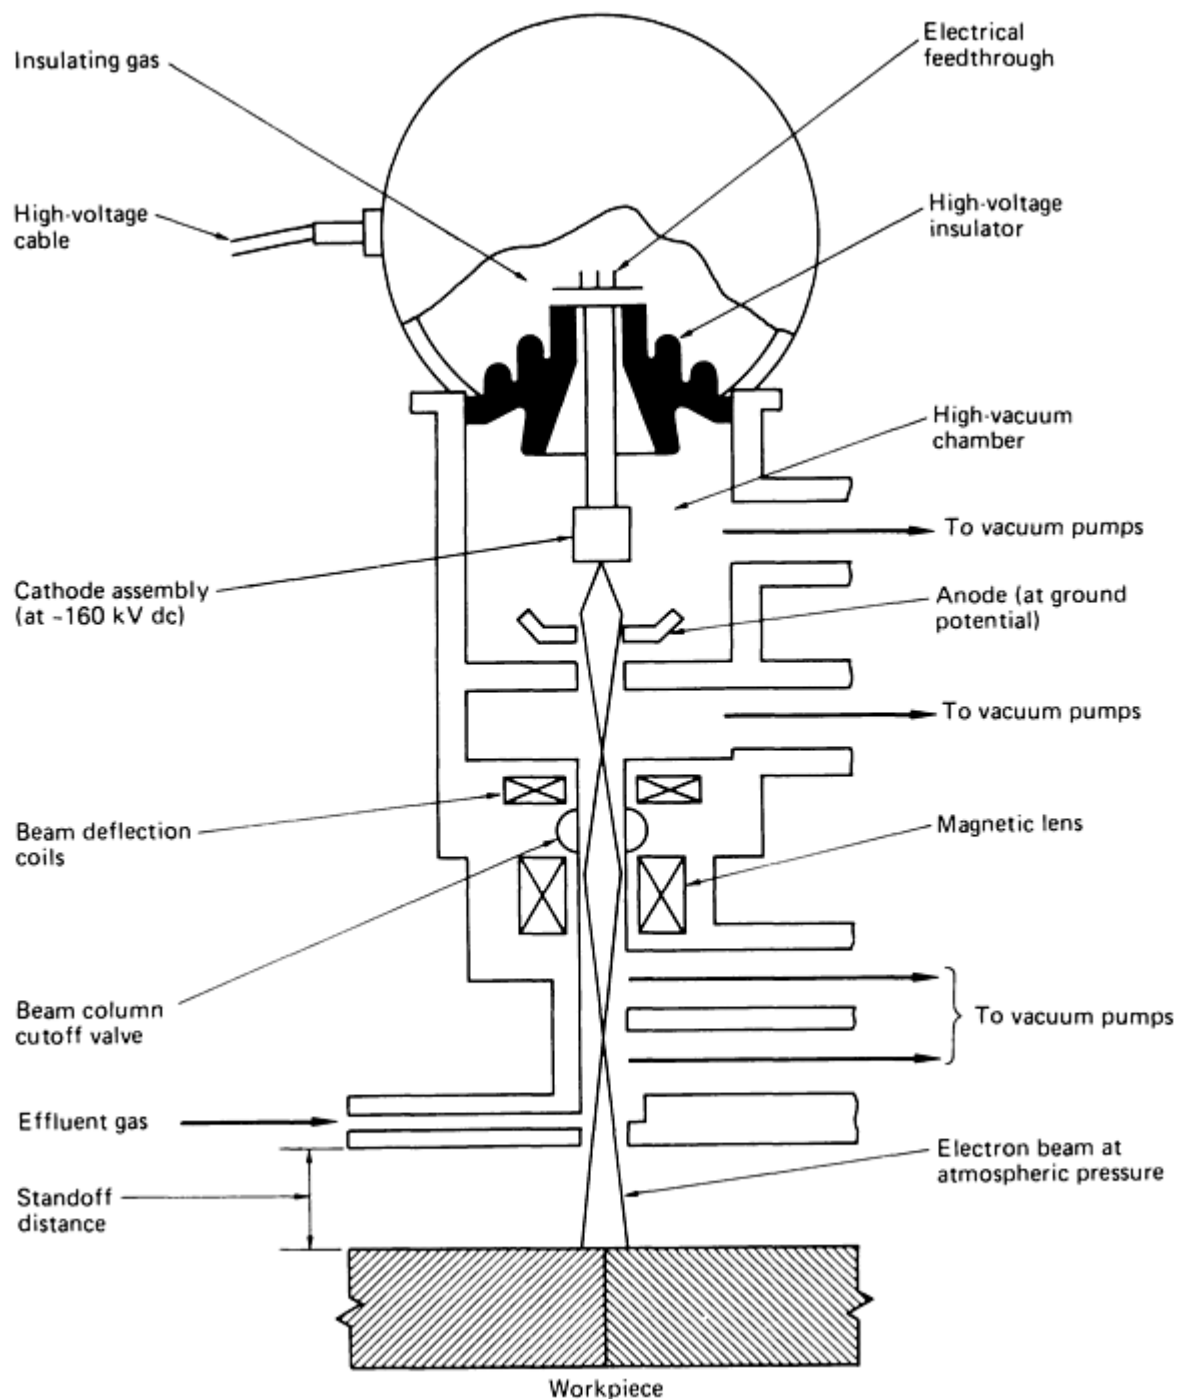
SCHEMATIC SHOWING PRIMARY COMPONENTS OF AN ELECTRON-BEAM WELDING HEAD
